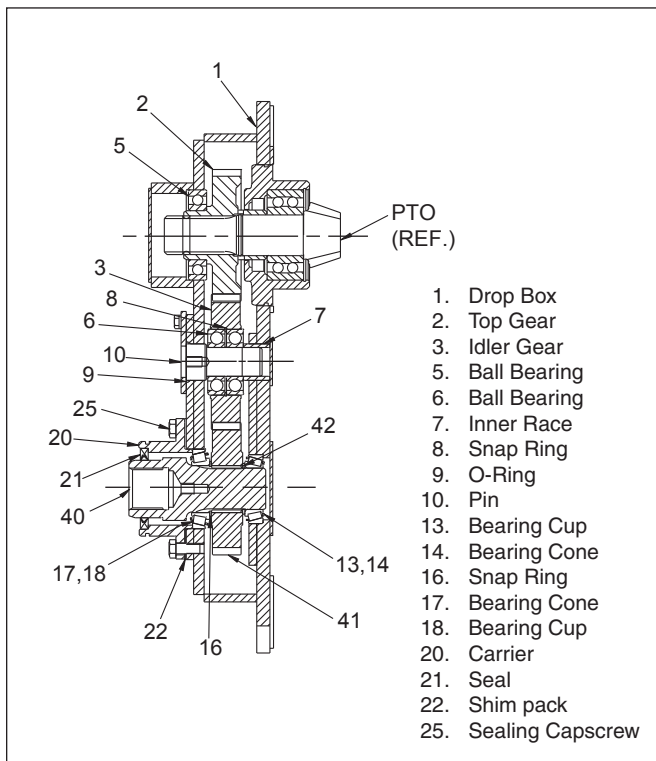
Gearbox on W6F for Caterpillar D6H/R (C480)
